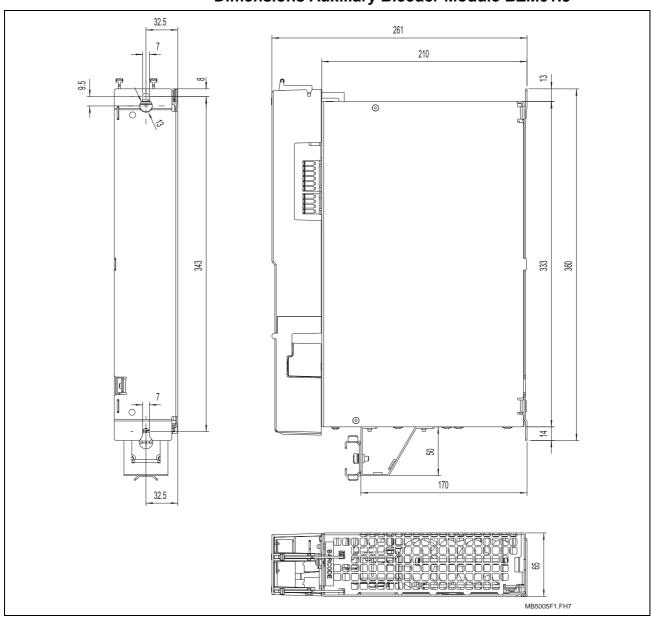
Dimensions Auxiliary Bleeder Module BZM01.3
